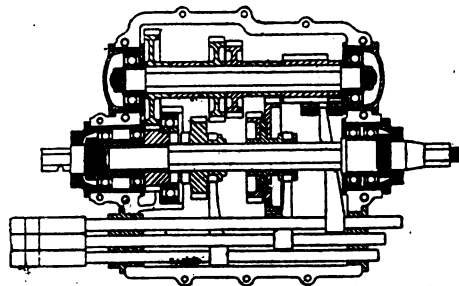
Sectional Plan View of Gate-Controlled Gear-Box.
